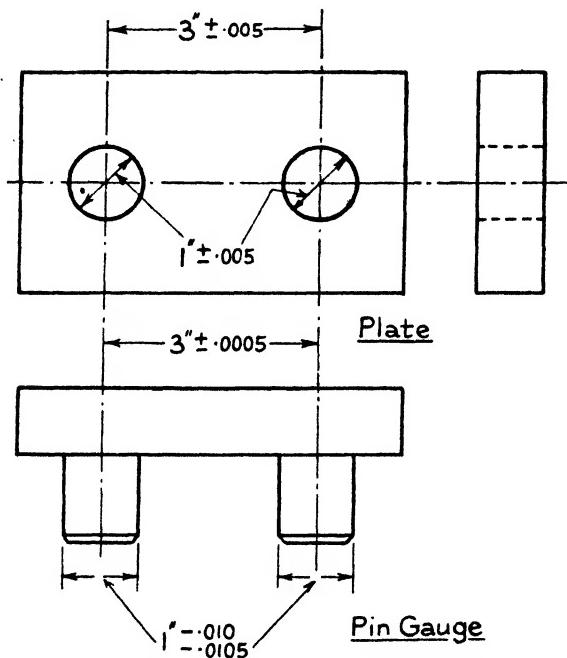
PERFORATED PLATE AND PIN GAUGE
